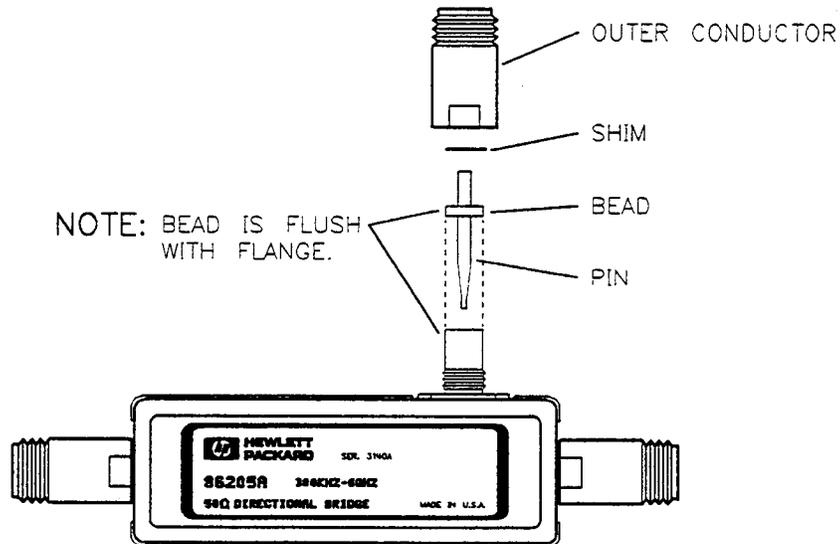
Center Pin and Bead Placement in the Connector Assembly
